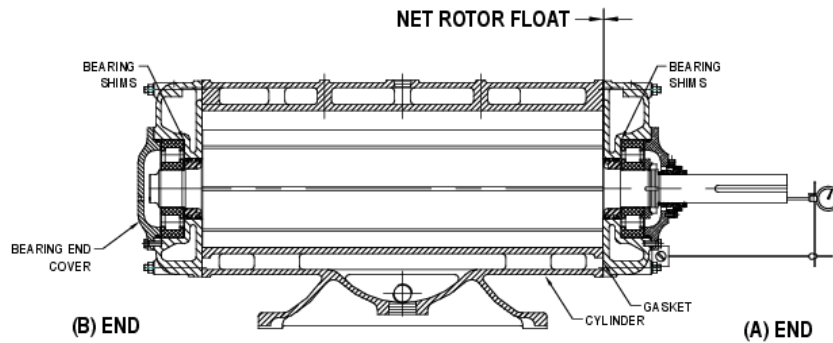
Net Rotor Float (Total Rotor Float less the sum of Fixed Rotor End Clearances).
